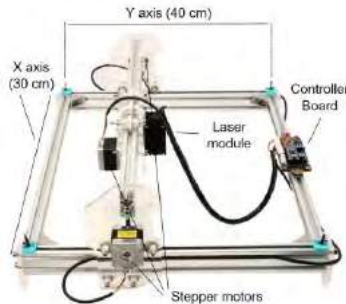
Laser Cutter EleksMaker Laser-A3 Pro 2.5 W. It is formed by: a laser module, a controller board, three stepper motors, four stainless-steel blocks that form the working area of the machine and another stainless-steel block to hold the laser module and allow its movement in two dimensions [4].
